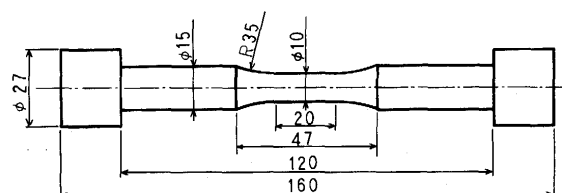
Shape and dimensions of low cycle fatigue test specimen.
